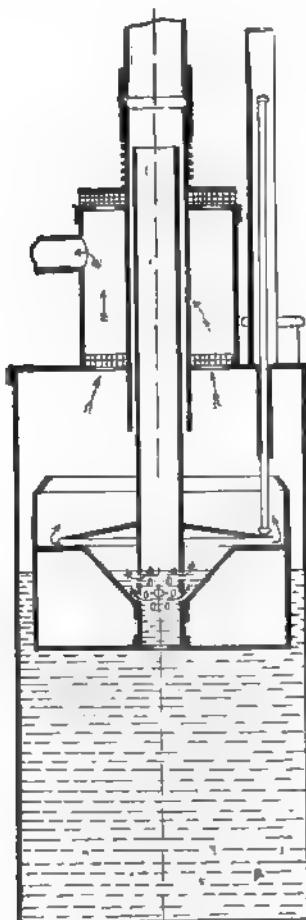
The Daimler Filtering Carburetter, used on the early Daimler cycles and carriages.
